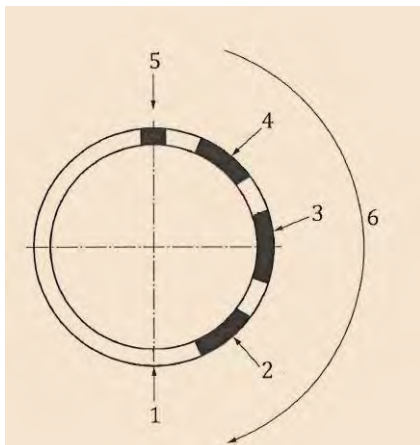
Location of the test specimen for the butt joint in the plate (top view) and pipe
